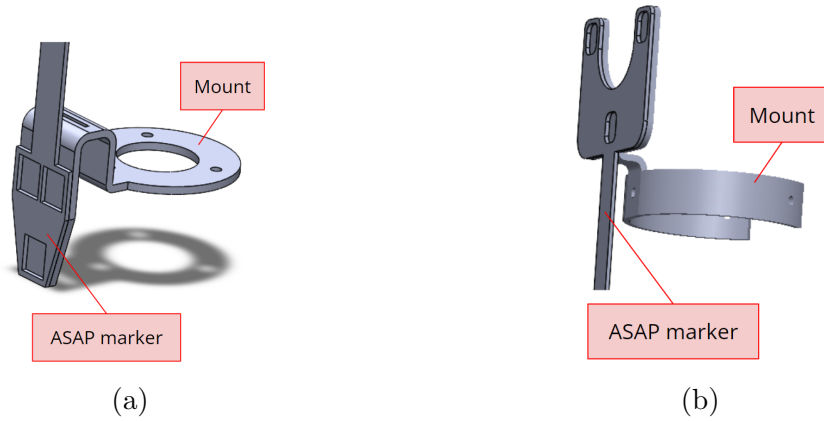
ASAP optical marker CAD drawings for the a) triangle flex marker and mount and b) fork flex marker and mount.
